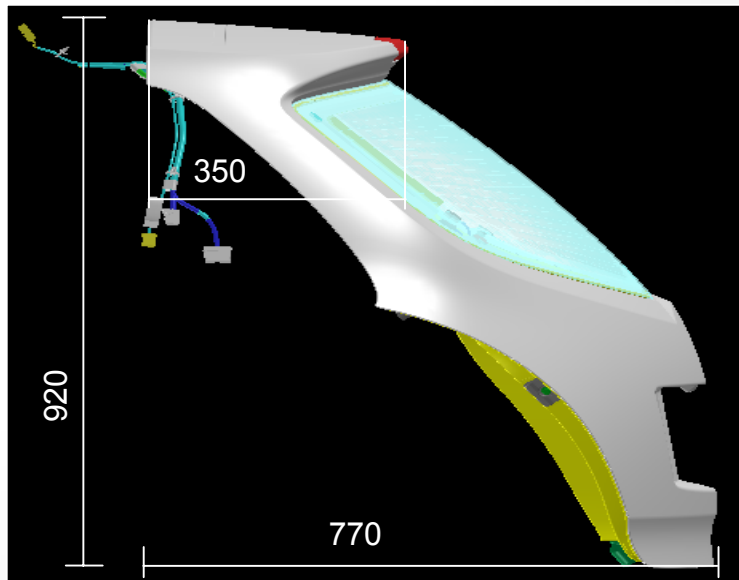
Side view Nissan Murano Hatchback door (Source: Nissan)
